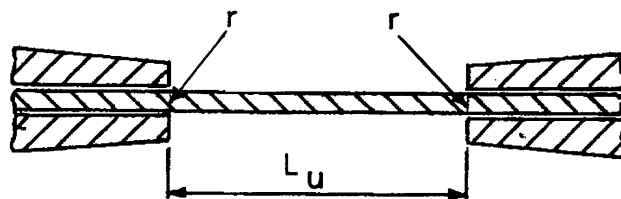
TEST PIECE MOUNTED IN WEDGE GRIPS.
